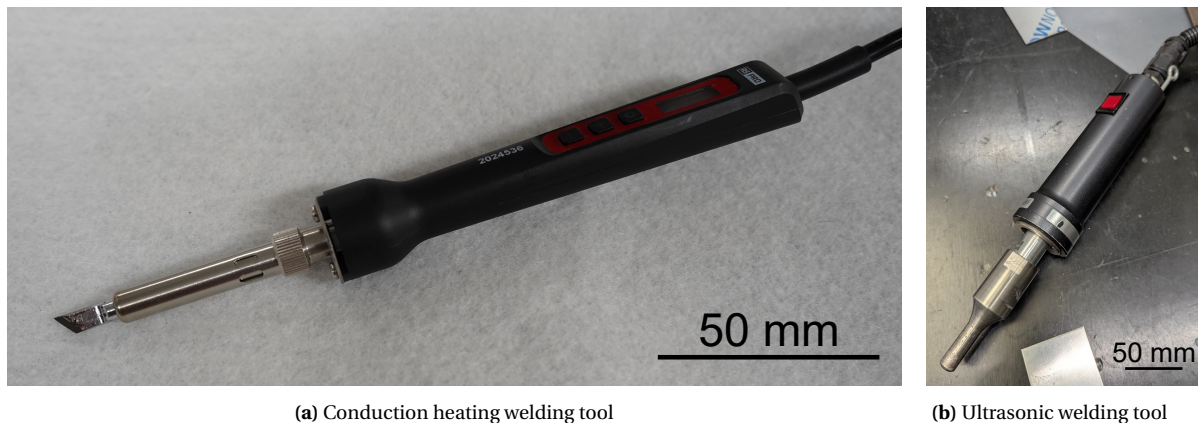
Manual welding tools used to adhere the tape onto the substrate
